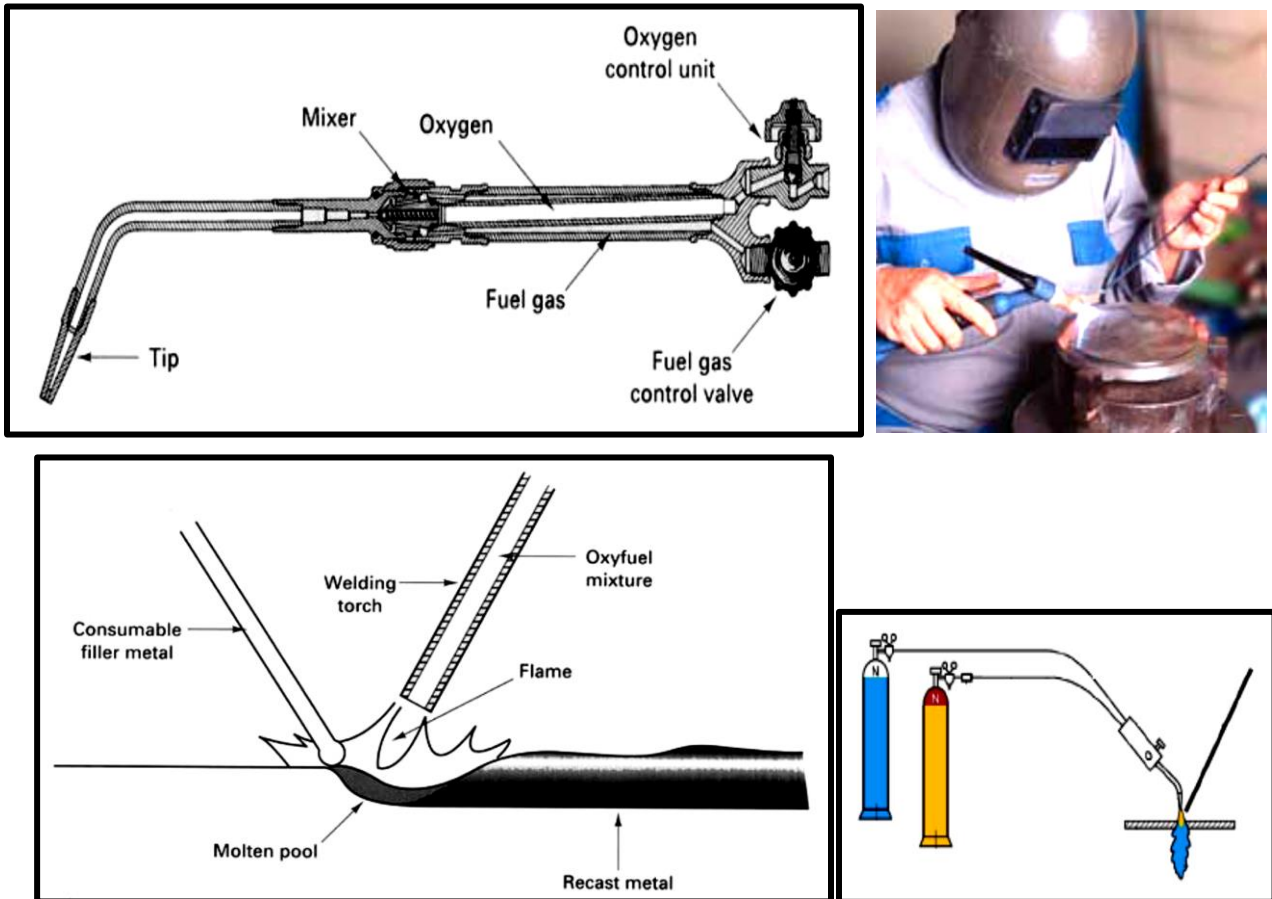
Oxyfuel gas welding theory and arrangements
